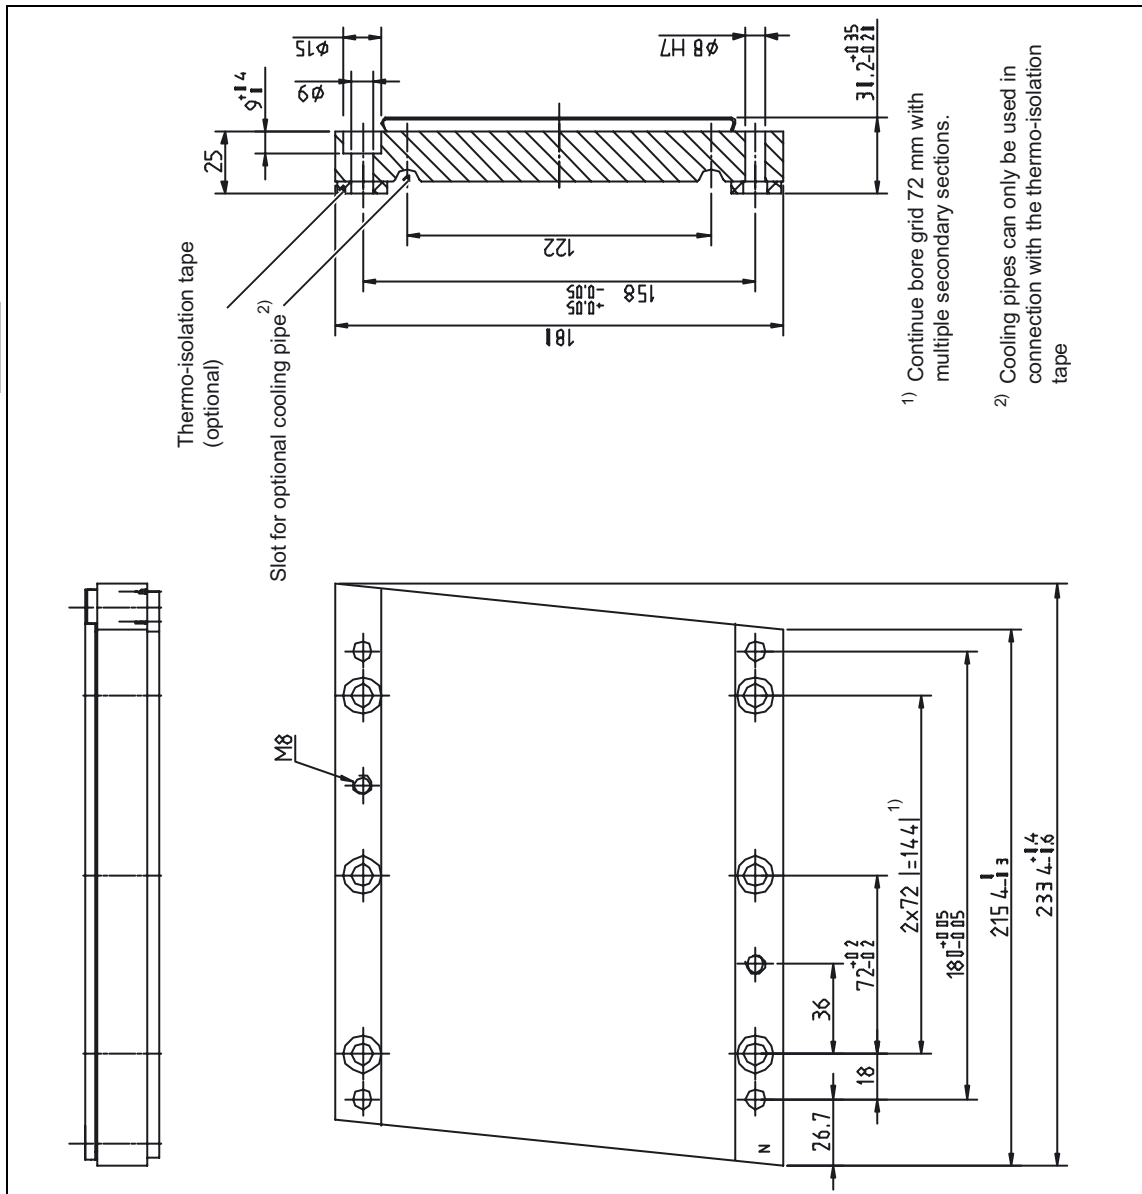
1FN1120-0AA00-0AA0 secondary section (short)
